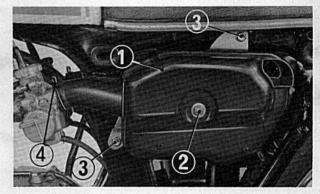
(1) Air cleaner case (2) Case attaching nut
